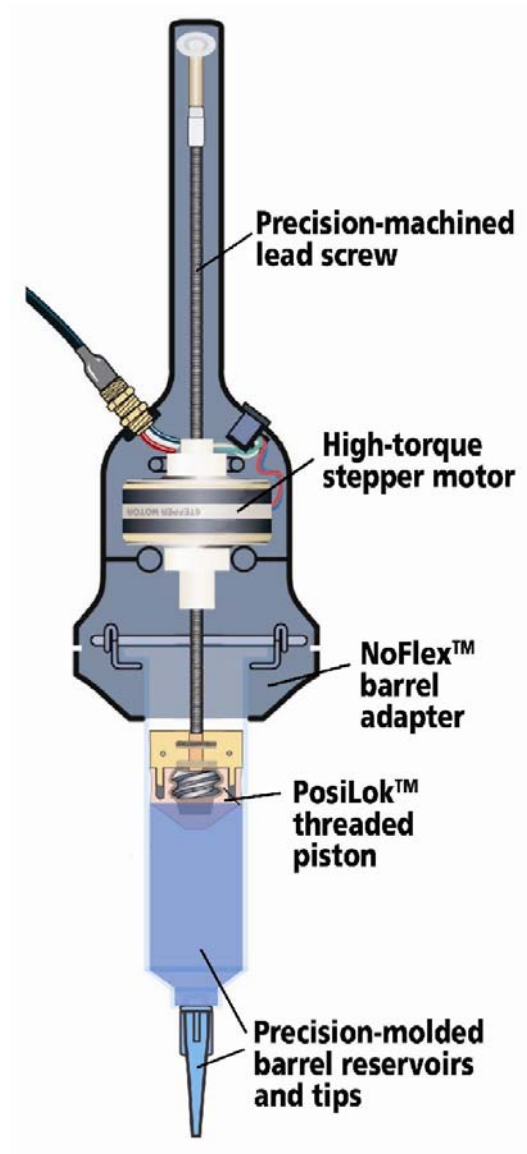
Cutaway View of LDS9000 Dispensing Gun
